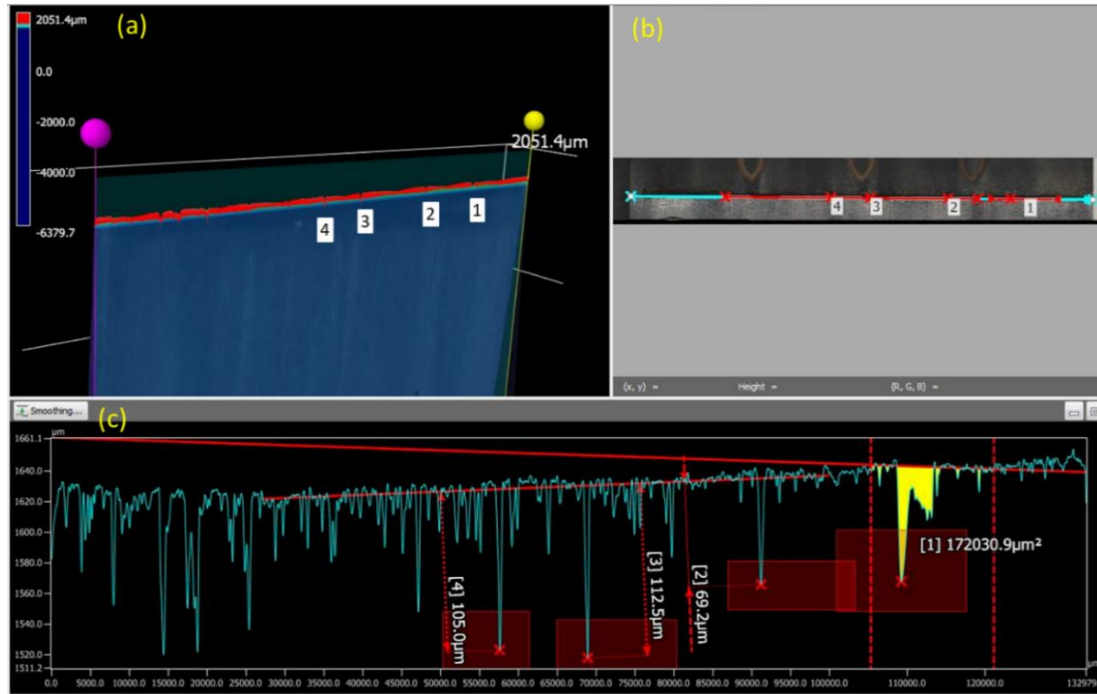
(a) Keyence 3D image of the entire trim edge of the lower tool after 96,900 trimming cycles, (b) Optical image of the lower tool trim edge with four locations marked for further measurements, and (c) Results of the profilometry of the lower trimming tool with the measured depth of microchipping for locations 1 to 4.
